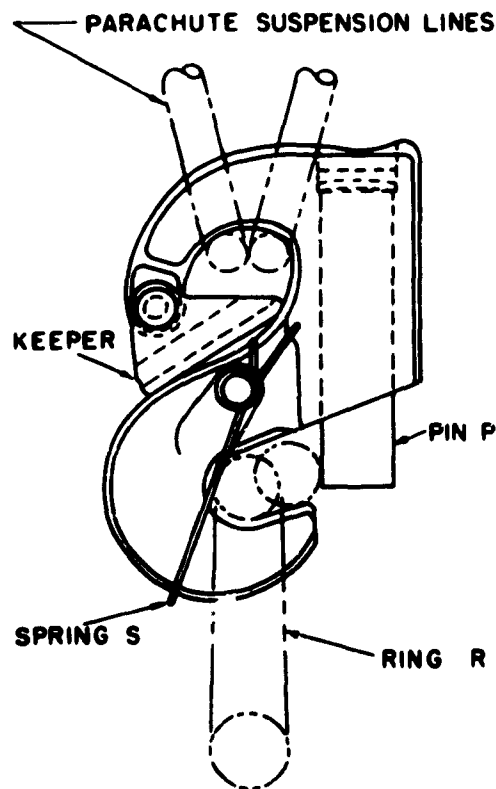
Parachute Canopy Release Assembly, Spring-Actuated Hook Type
